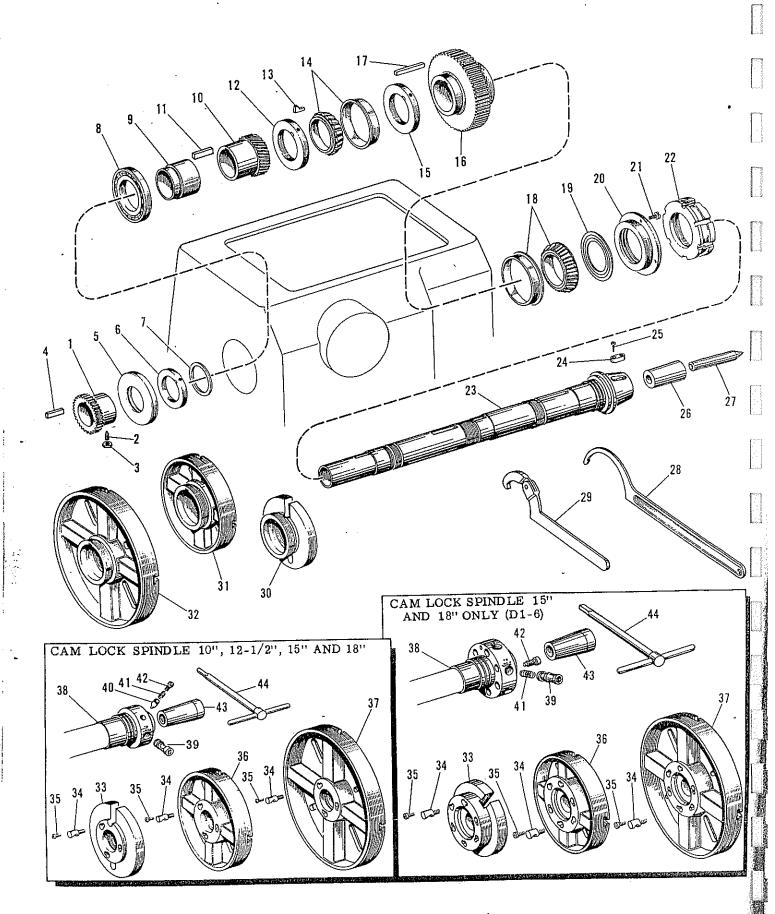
Headstock Spindle Assembly ("A" Shaft)
